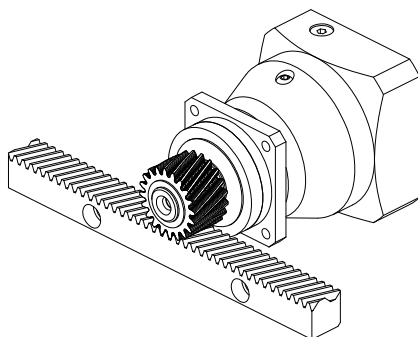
Recommendation for bearing assignment D (e.g. for helical gearing)
